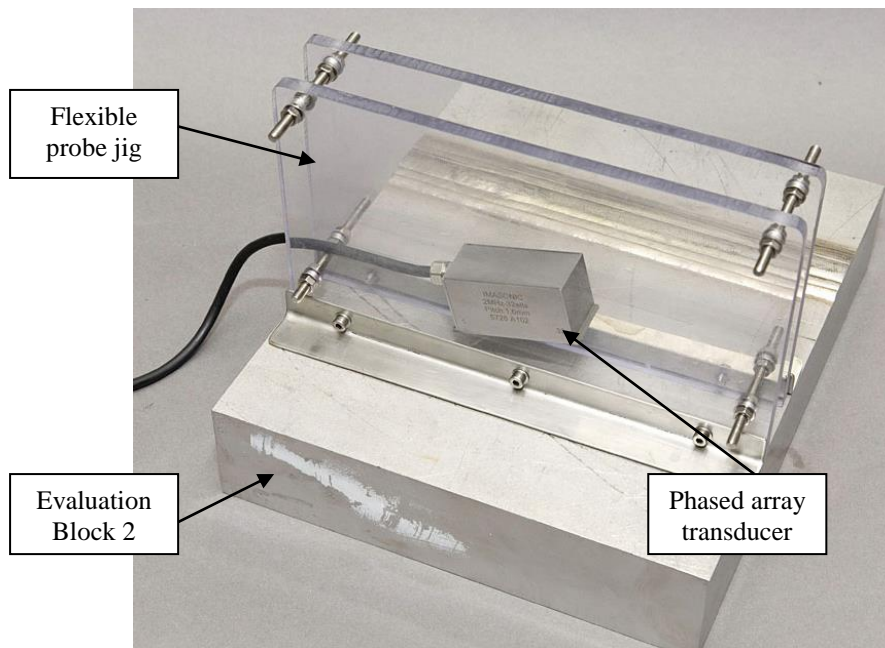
Photograph of the bespoke probe jig for internal noise signal measurements.
